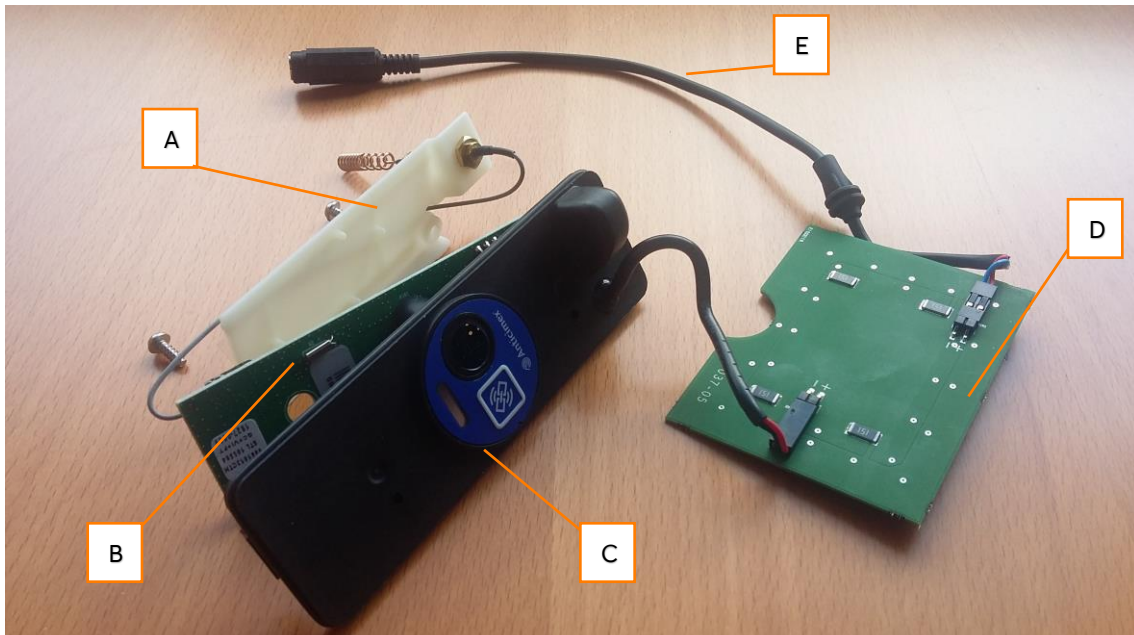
Electrical network. A) Inner panel with antenna fixture. B) The main PCBA. C) The frontward keyboard panel. D) Heater PCBA connects power to main PCBA. E) Power cord to external power supply.
